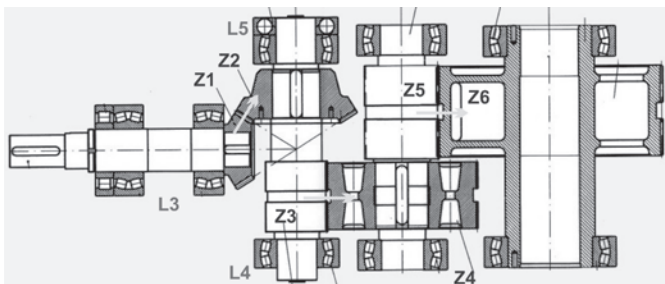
Belt drive gearbox scheme with the locations of accelerometers (L3, L4, L5)
